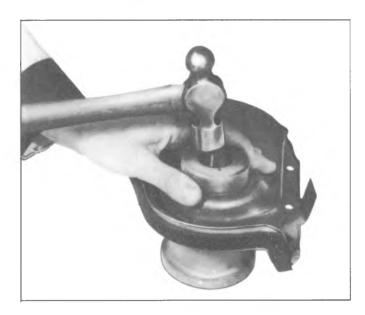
A-36--Installing Oil Seal (Cover Removed)
